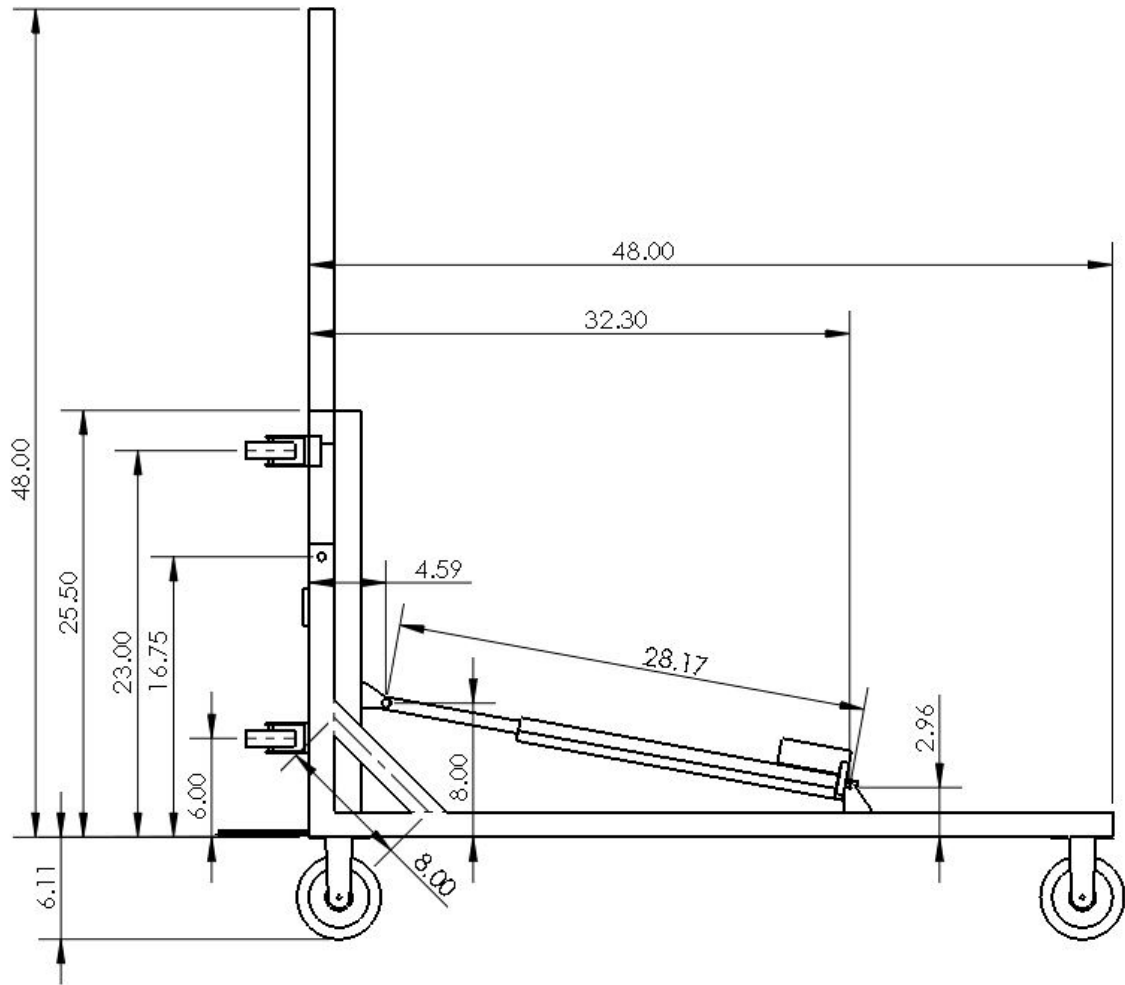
SIDE VIEW OF HANDTRUCK WITH DIMENSIONS IN INCHES
